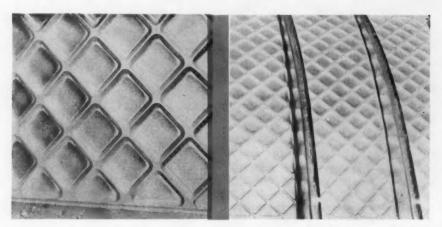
Illustration showing a section of a test panel which has been chemically milled.
